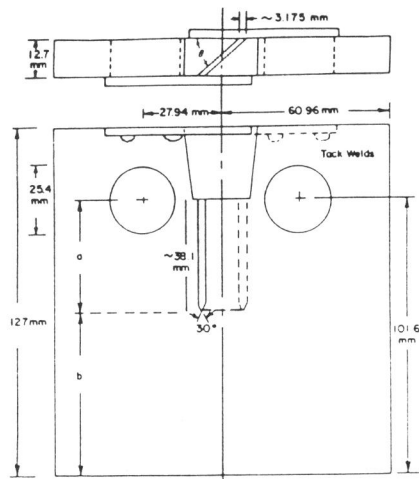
Modified Compact Specimen for Measuring Mixed-Mode Fracture of Steel. Side Grooves Omitted for Clarity
